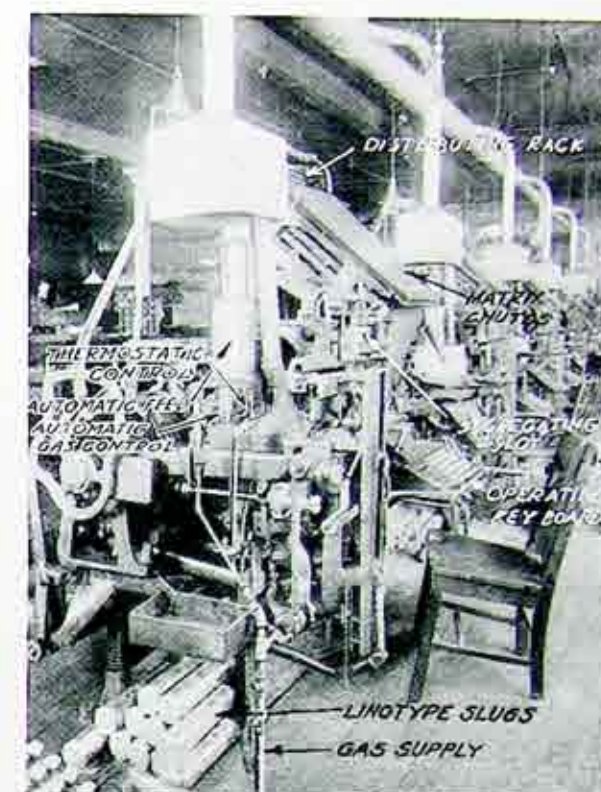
Row of linotype machines equipped with gas burners to melt metal.
